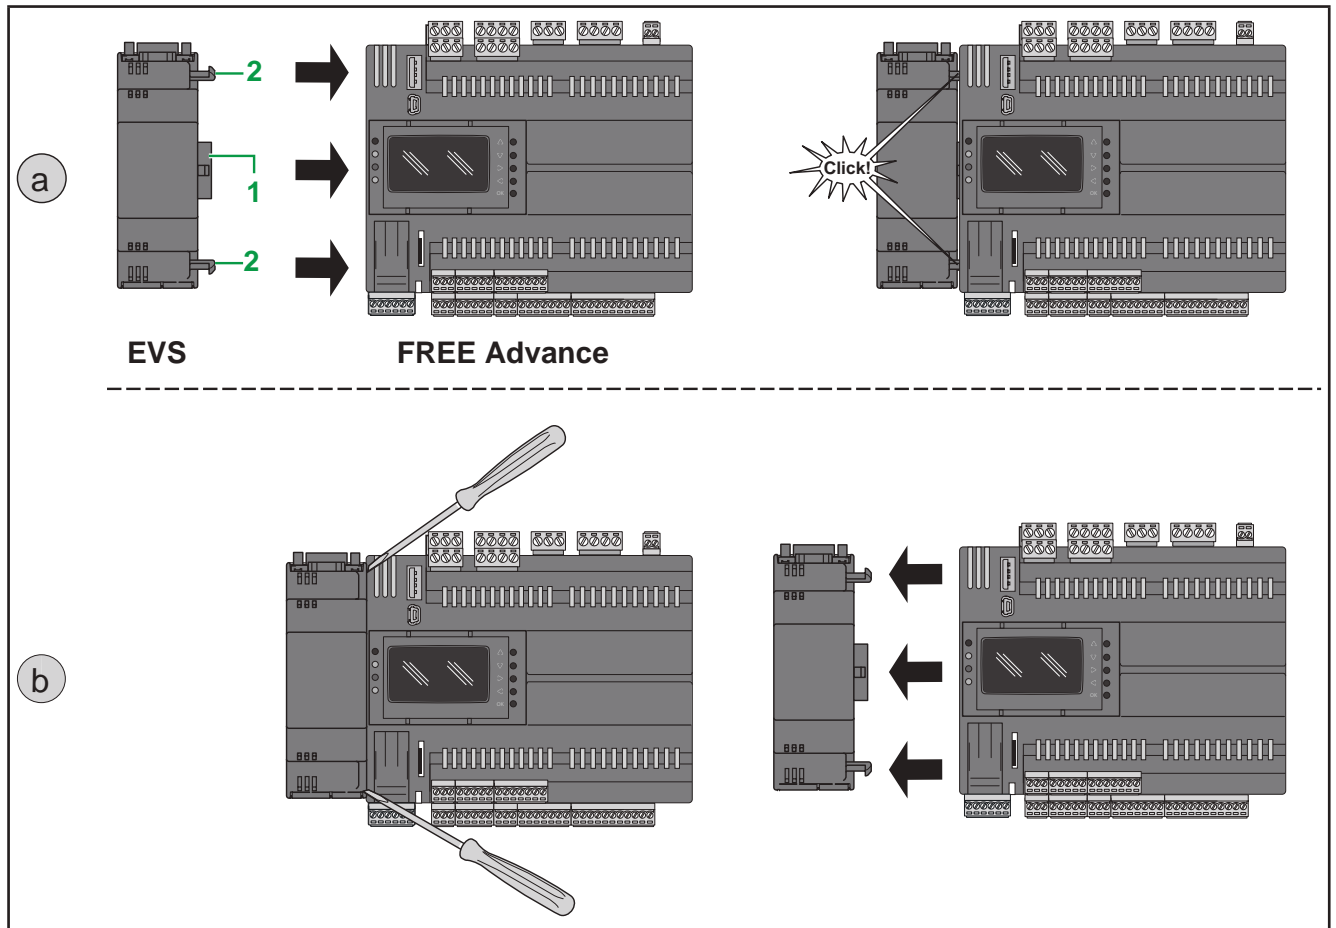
Assembling (a) / Removing (b) the EVS Communication Modules
